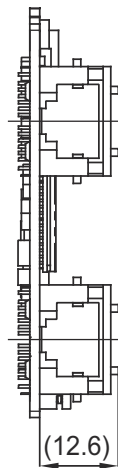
SOM-DB5920 Board Mechanical Drawing - Front
